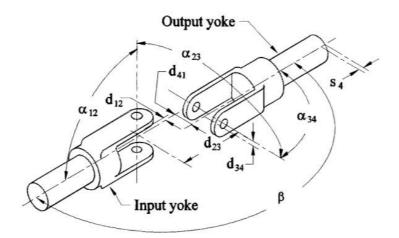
Pin and block type universal joint with manufacturing tolerances
